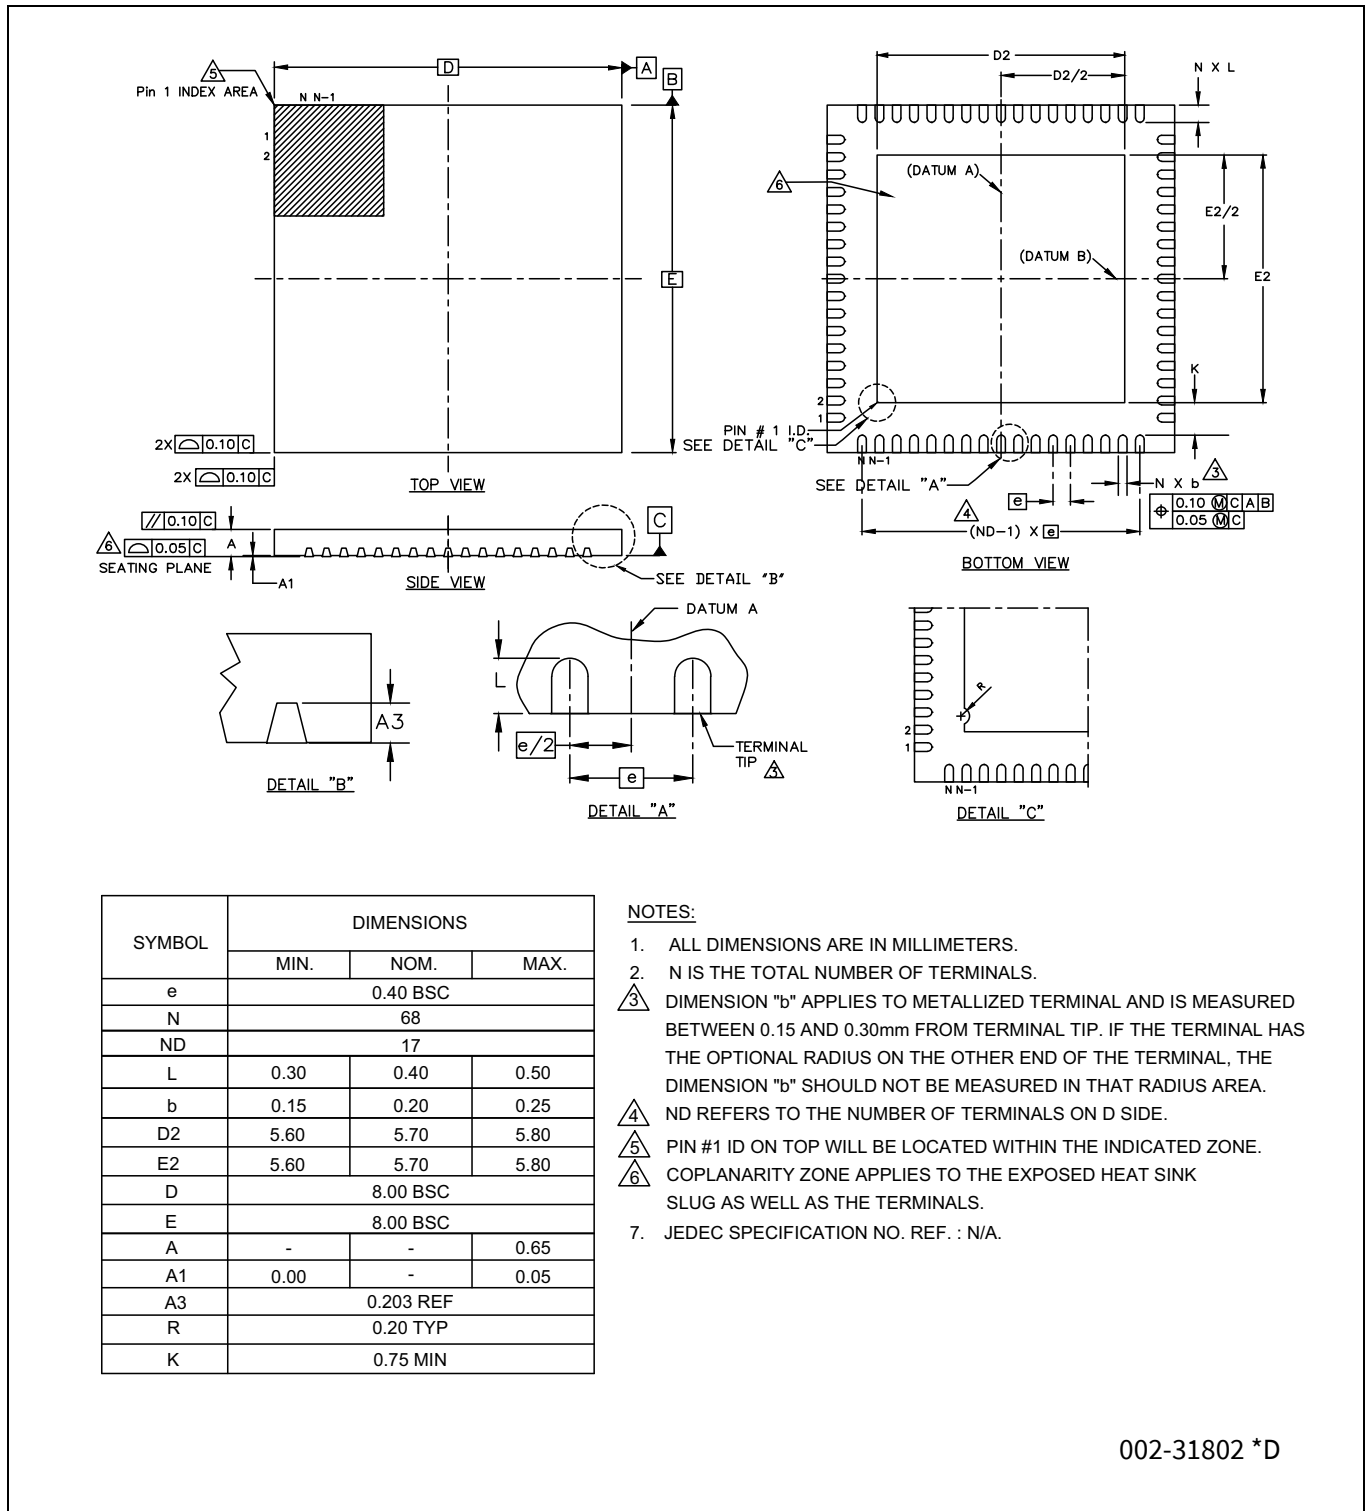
68-lead QFN ((8 × 8 × 0.65 mm) LD68B 5.7 × 5.7 mm E-Pad (Sawn)) package outline (PG-VQFN-68-800), 002-31802
